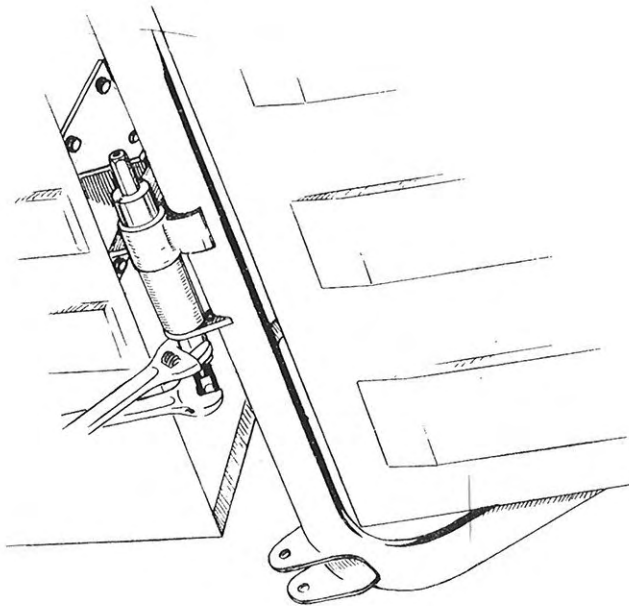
Pressing rubber bushing out or in without removing rear axle unit
